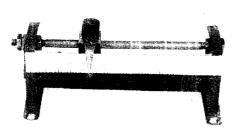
By attaching a nut to the spindle, the pointer is fastened more quickly than by the method in Fig. 1
